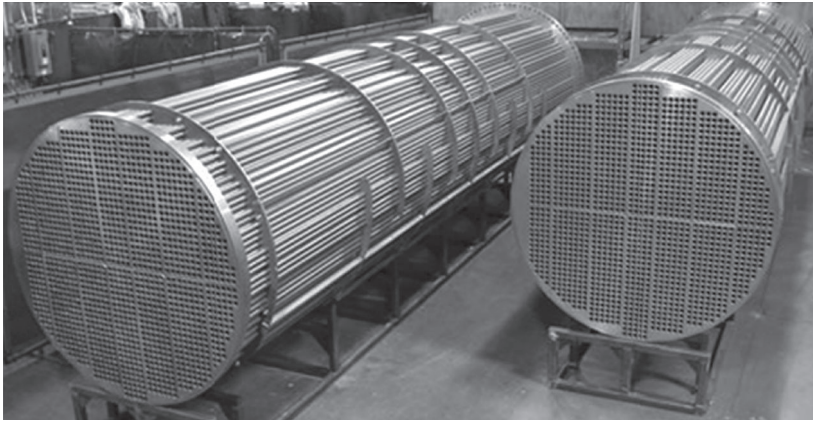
Multipass titanium tube bundle assemblies. (Courtesy of TITAN Metal Fabricators Inc, Camarillo, CA.)
